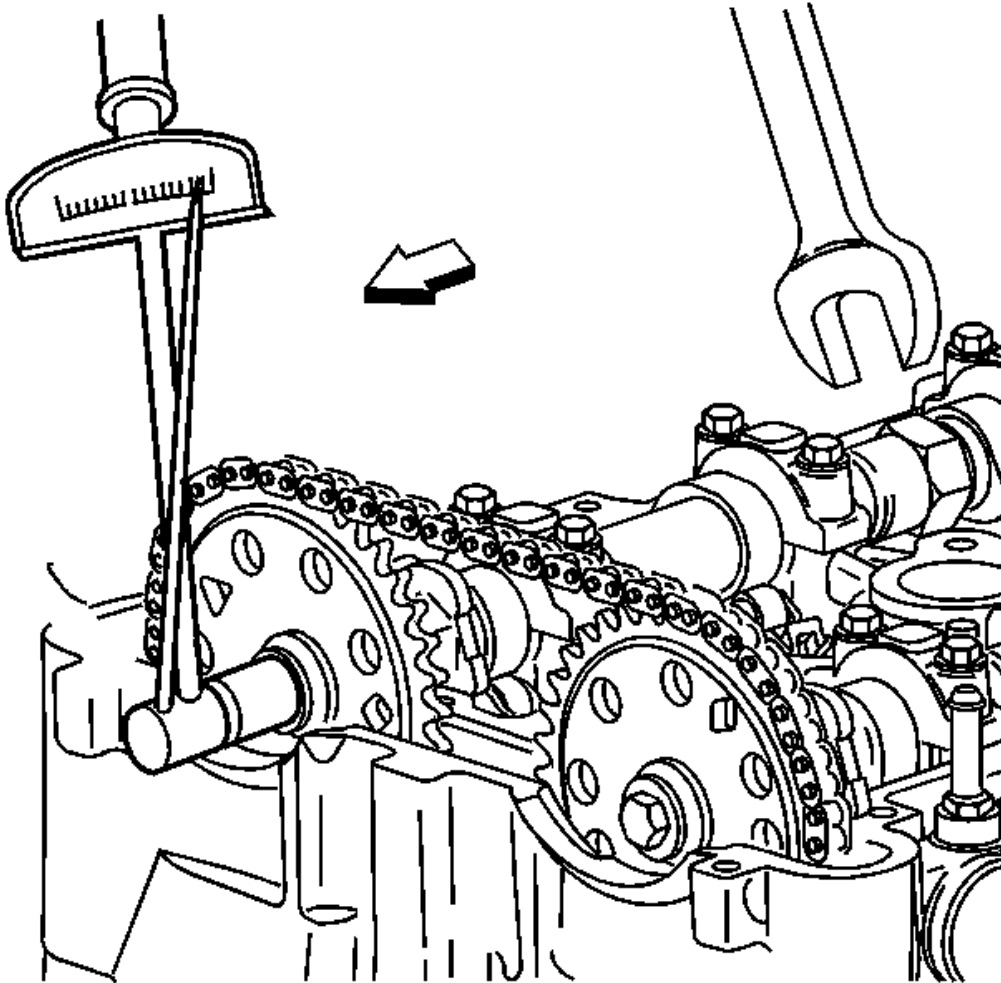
Holding Camshaft Stationary With Wrench On Hex Casting On Camshaft
